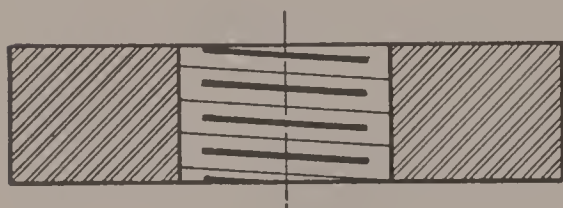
Conventional Drawing for Threads in Sectional Pieces
